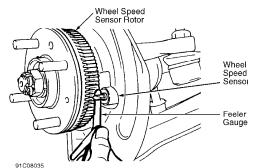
Checking Wheel Speed Sensor-To-Rotor Gap (Typical) Courtesy of Mitsubishi Motor Sales of America.
